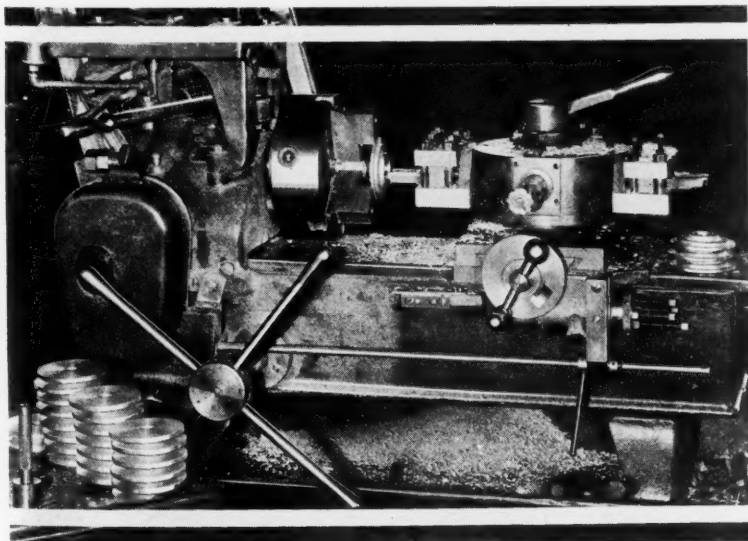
Small-size Porter-Cable Turret Lathe Built for the Rapid Machining of Small Castings—Capable of Spindle Speeds up to 2200 Revolutions per Minute, with Feeds Varying from 0.005 to 0.020 Inch per Revolution
